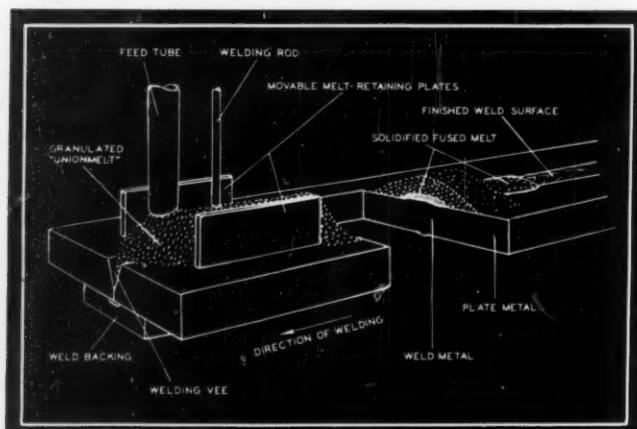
Welding arrangement showing method of covering arc with melt material
